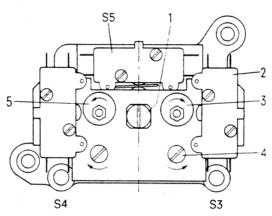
a: Roller switching mechanism (plan view)
